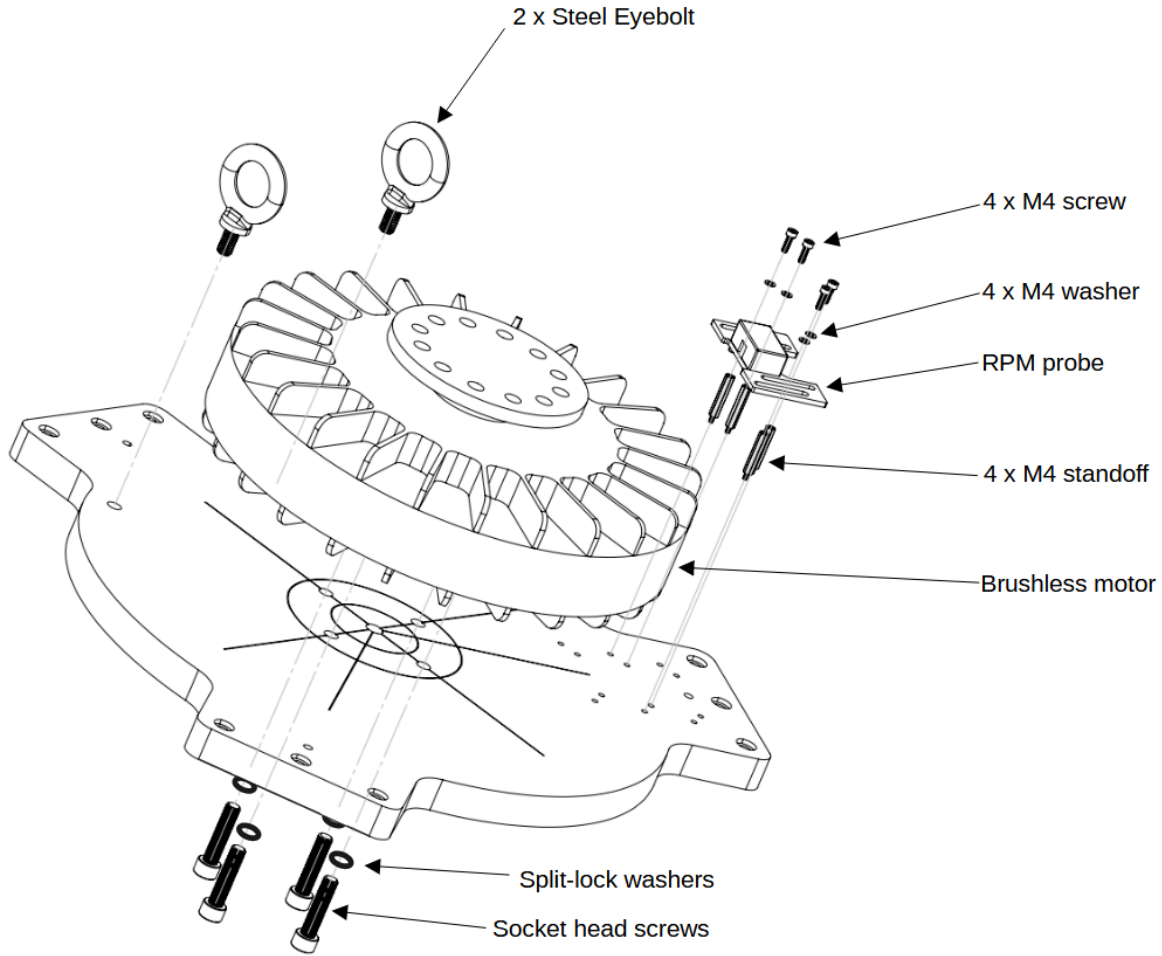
A.1: Mounting the RPM Probe and eye bolts on the motor mounting plate
